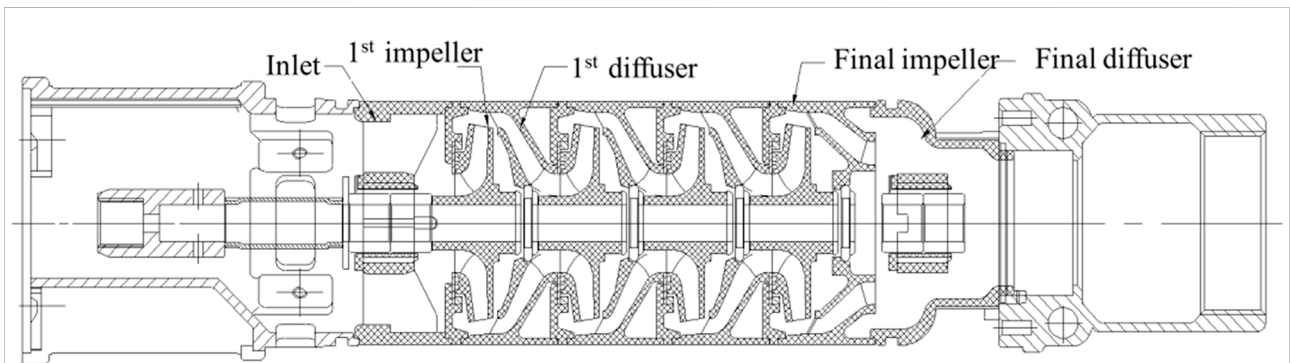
Assembly diagram of overflow parts of the deep well pump.
